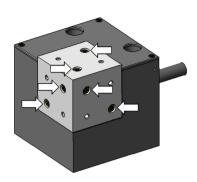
The arrows show the position of the 6 mounting screws of the fiber holder.
